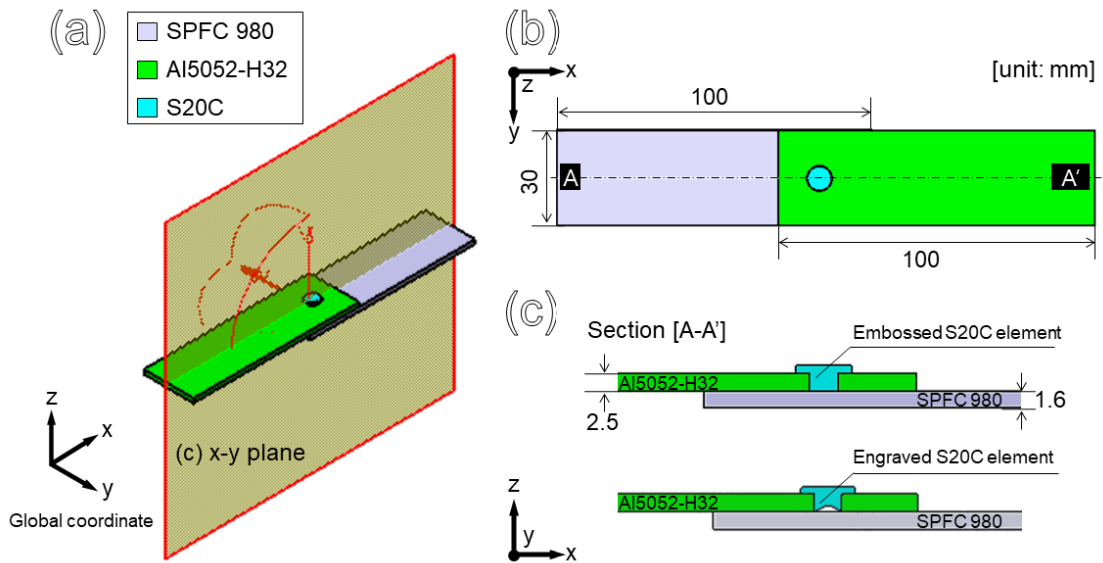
Schematic sketch of Al5052-SPFC980 steel dissimilar joints. (a) 3D modelling and its material assignment (b) top view image and dimension and (c) cross-sectional image of different S20C element geometries
